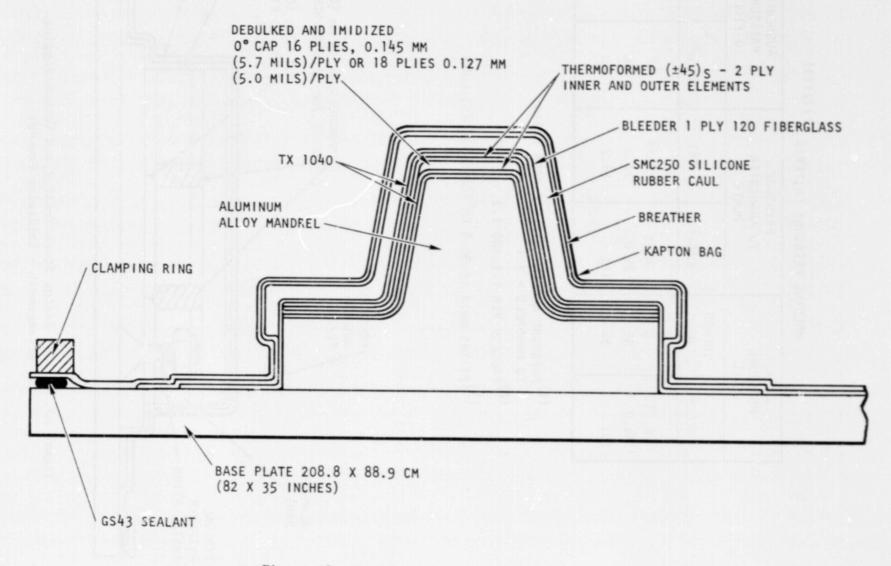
Layup and Tooling Process Hat-Stringer Assembly
